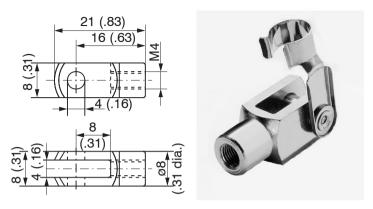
Attachment head GK1-WDS, dimensions in mm (inches)
